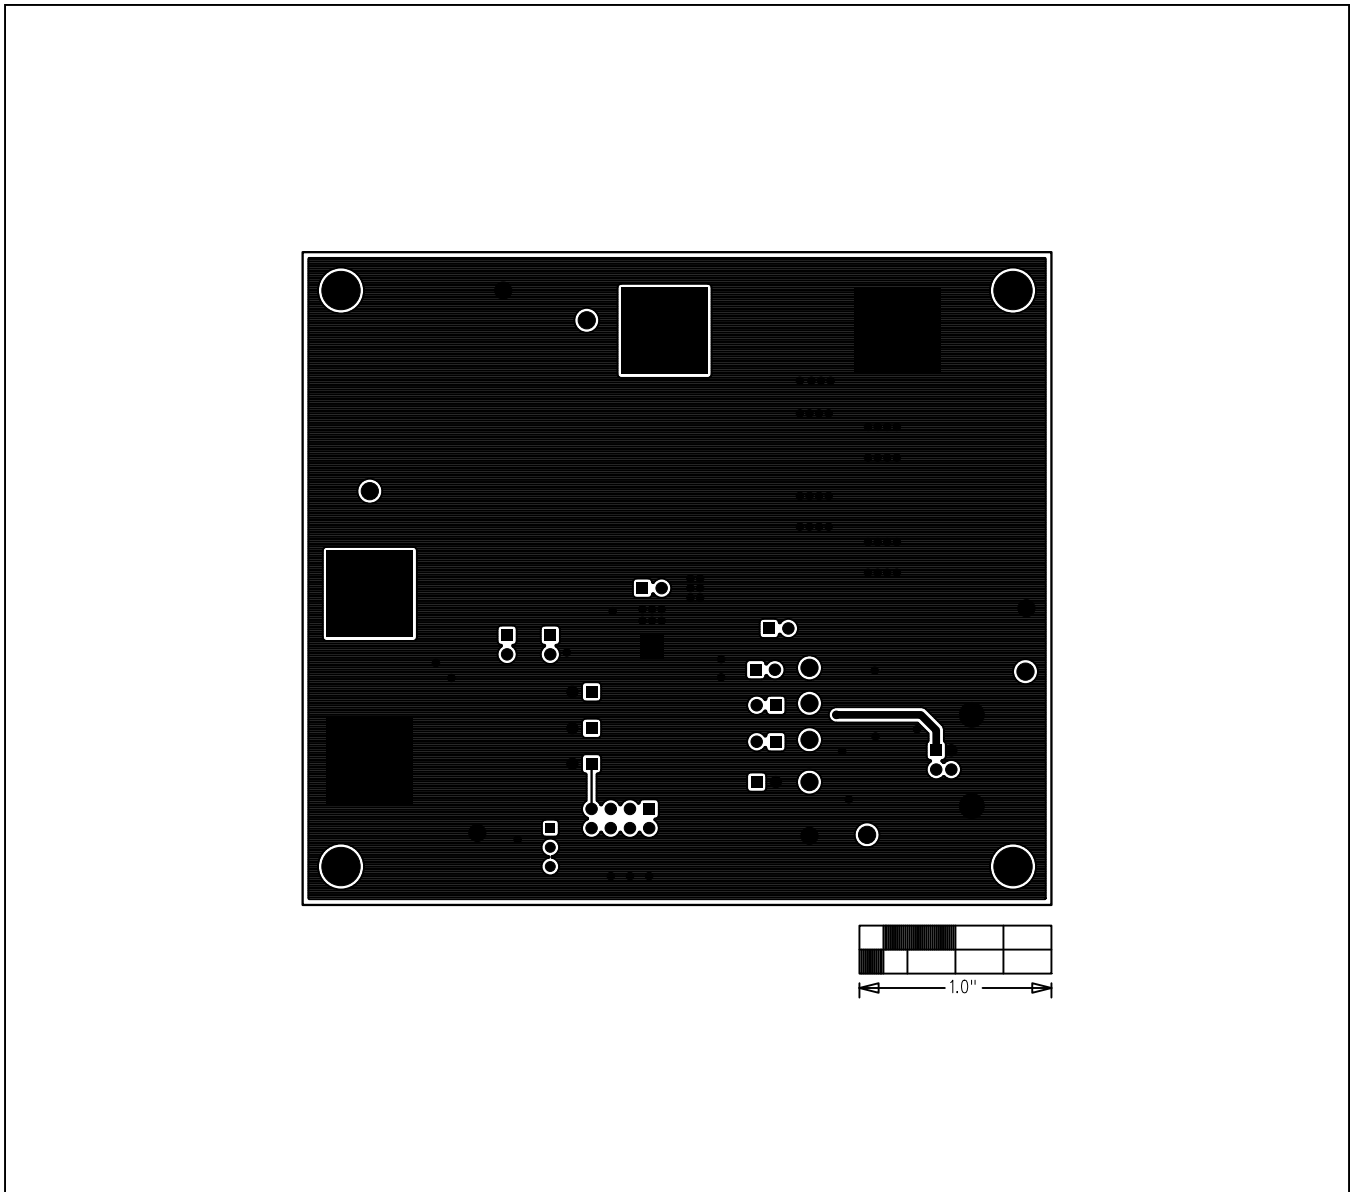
MAX14571 EV Kit PCB Layout—Solder Side
